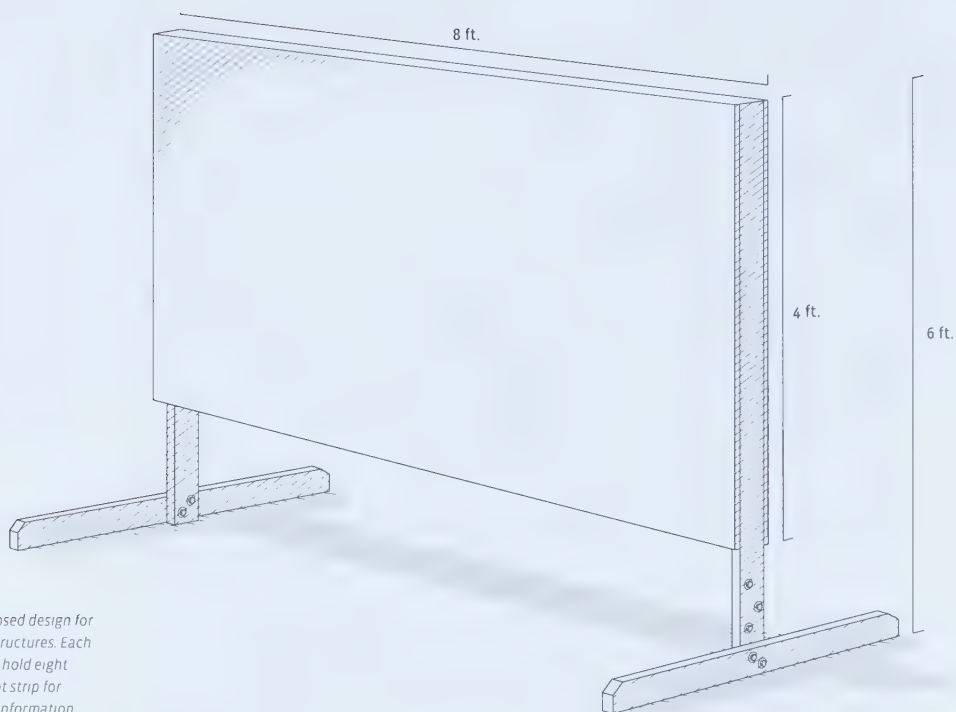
| The final proposed design for the temporary wall structures. Each side of the wall could hold eight posters and a one-foot strip for funding and contact information across the bottom
